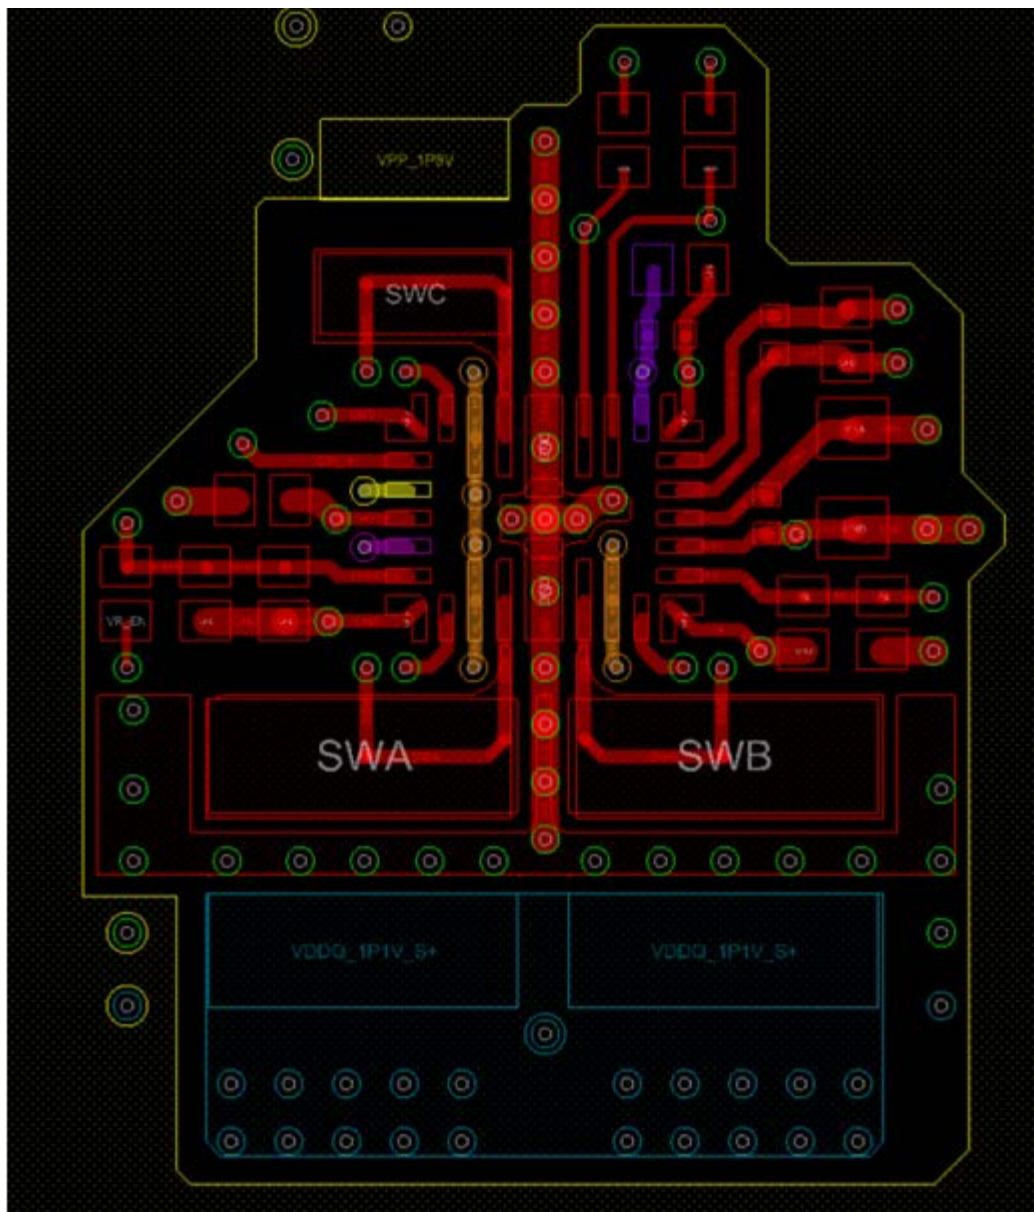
DDR5 DIMM PMIC Layout Example - Top Layer
